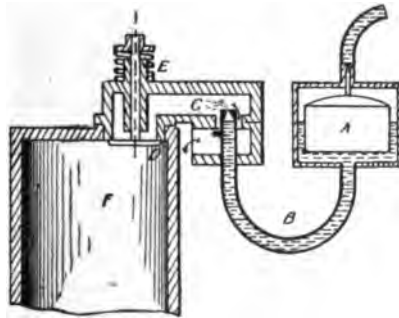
Maybach's Original Float Feed Carburetter. *A* is the hollow float carrying the spindle of the needle valve at its top; *B*, the tube leading into the inlet valve space; *C*, the spraying nozzle; *D*, the inlet valve; *E*, the inlet valve spring; *F*, the cylinder space.
